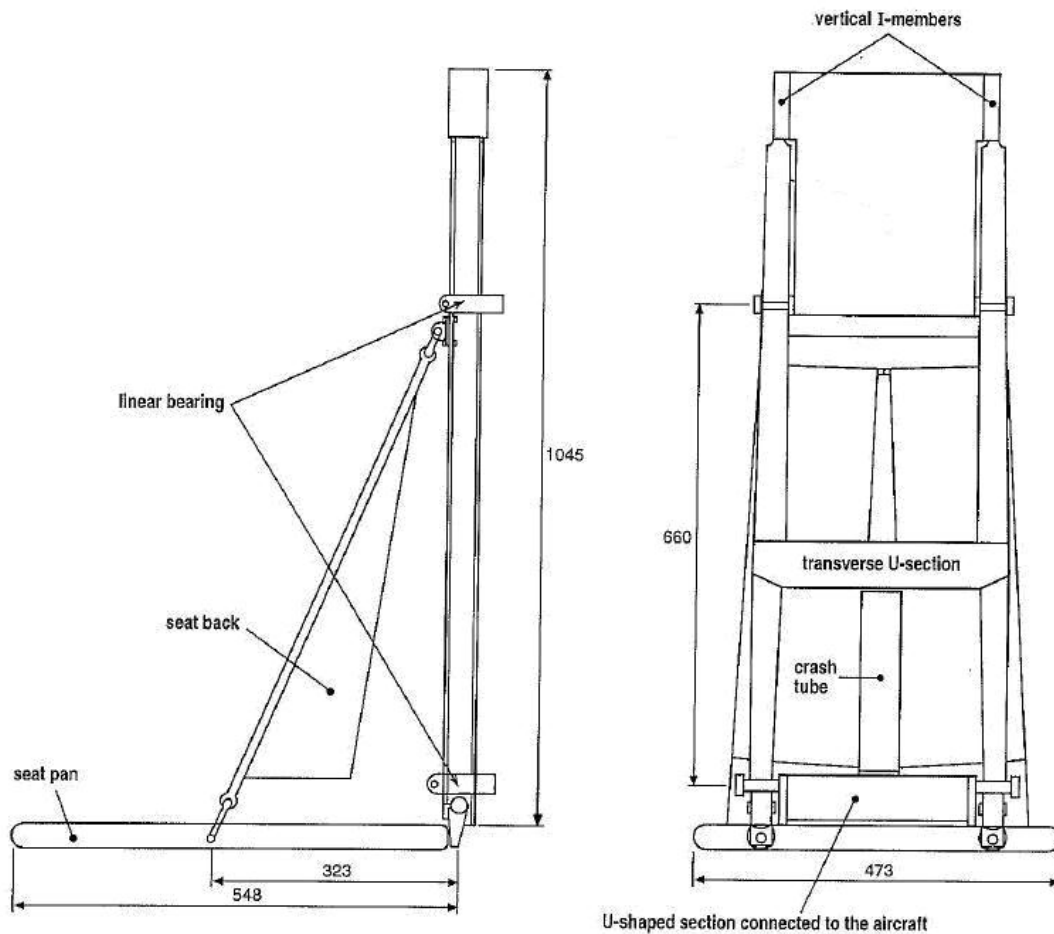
Overall dimensions in mm of troop seat (Ref 10)
